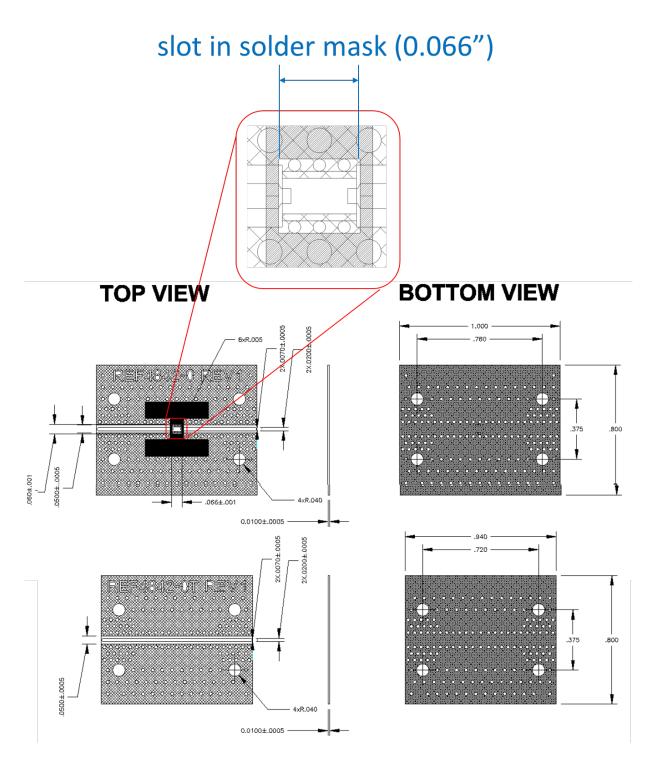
Detailed view of the test board used to test broadband attenuators of TSX series
